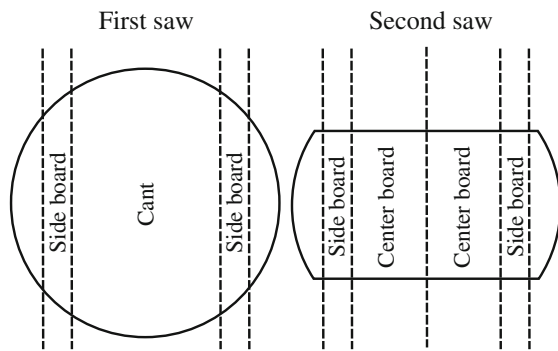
Cant sawing. The first sawing machine cuts the log into side boards and a cant. The cant is then rotated by 90° and cut by the second sawing machine into side boards and center boards. Side boards are further processed by edging and trimming, while trimming is the only operation on center boards
